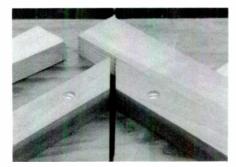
Clamping the side piece for the initial cut on the jig.
